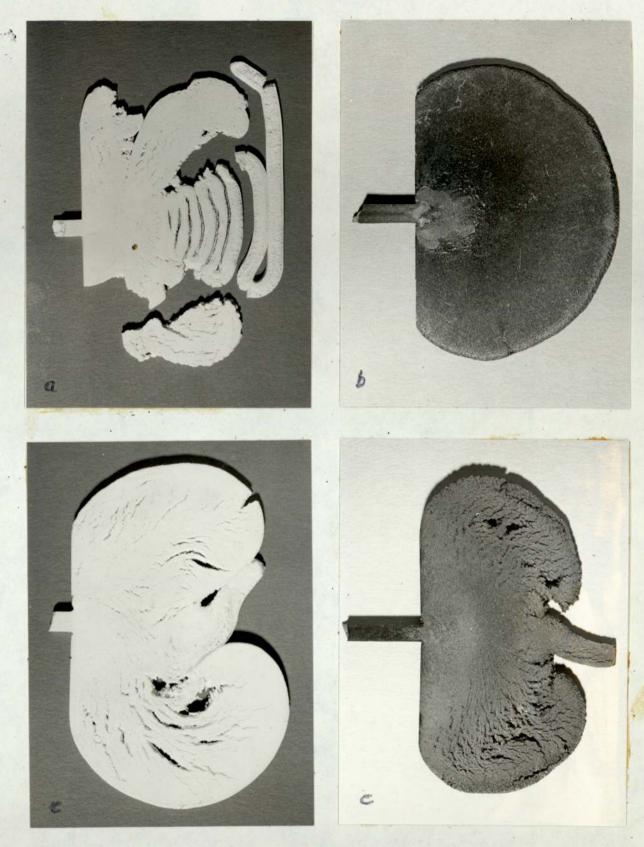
B. Mould filling pattern showing effect of increasing screw back pressure, screw speed, injection speed, and injection pressure. a Low machine parameter settings.
